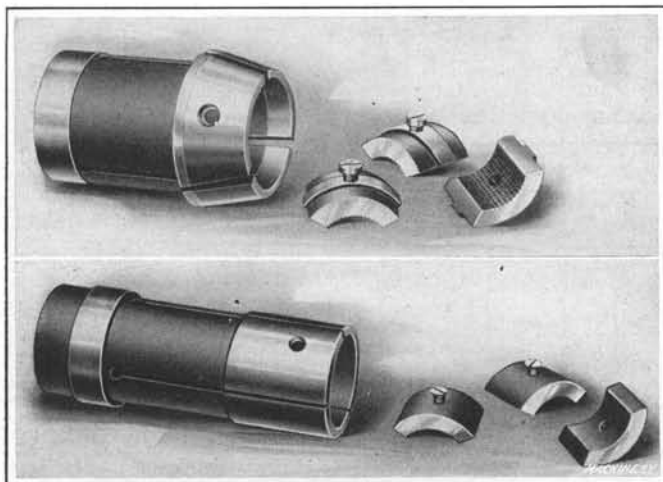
Master Spring Chuck and Feed Chuck with Gripping Jaws removed
